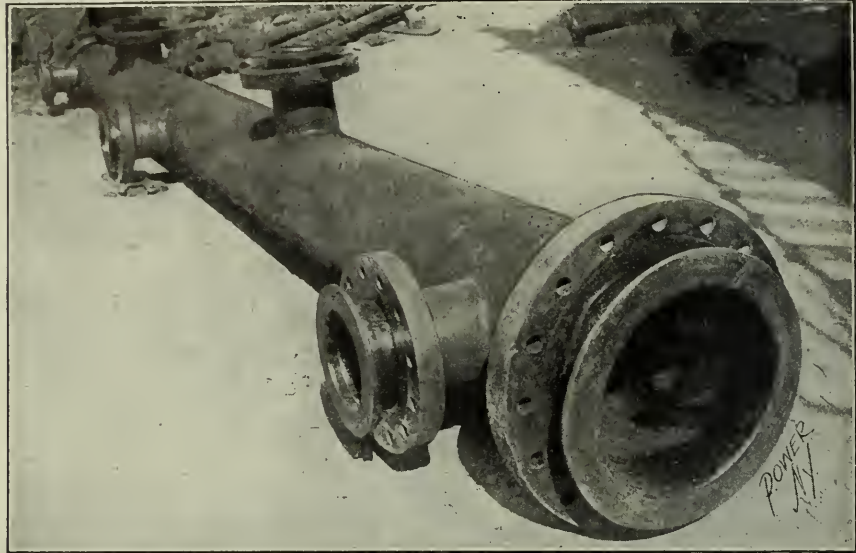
NOZZLES WFLDED TO STEEL HEADER
